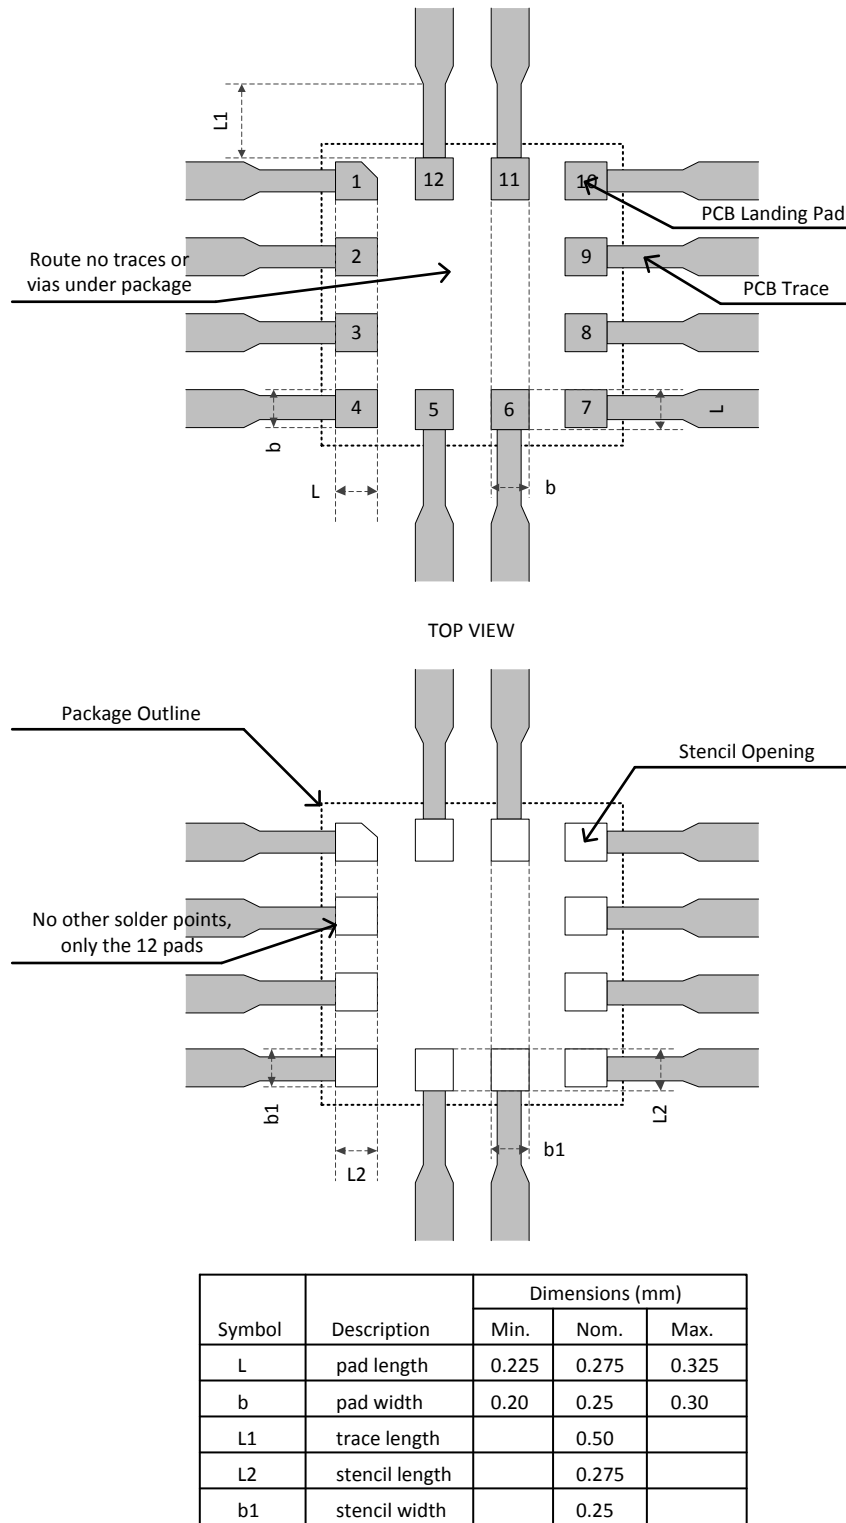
PCB and Stencil Design Recommendations (12-pin 2x2mm Package)
